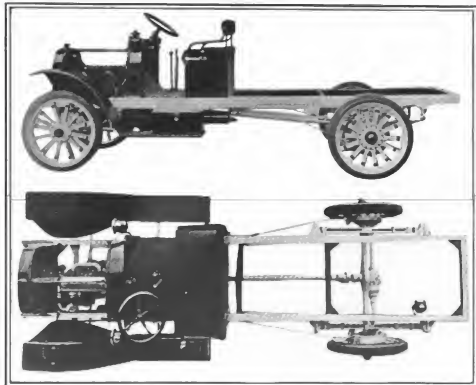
Side and top views of Superior chassis, showing overhead-valve motor and Torbensen rear axle
